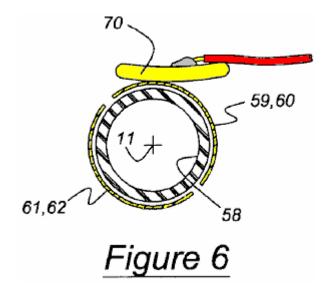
is cross sectional view of a sleeve shaft aligned with the rotor shaft showing a contact finger and bridge contact plates of the switching assembly
